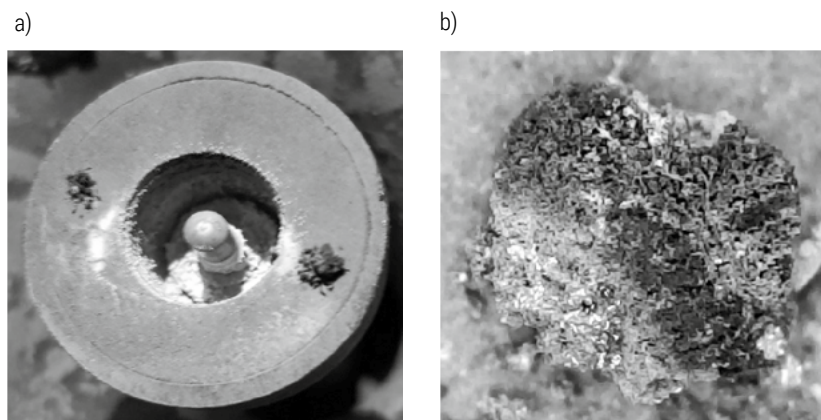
Magnetic coupling of a screw water meter a) view of a magnetic coupling surface with precipitates, b) a microscopic view
